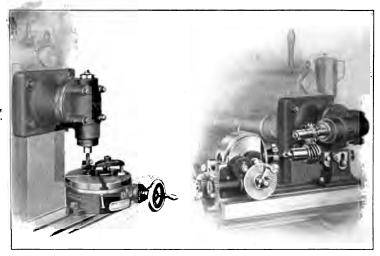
Vertical spindle milling attachment and circular milling attachment.
